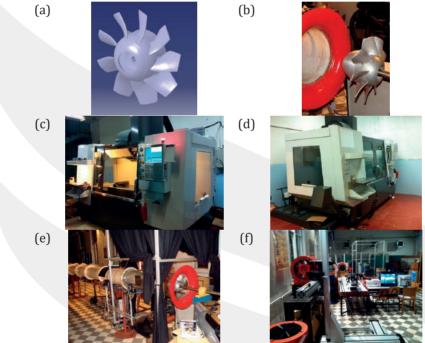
(a) CAD model of the axial fan impeller; (b) Axial fan impeller. [2] (c-d) CNC machines at the UB FME: (c) 4-axis; (d) 5-axis.ef) Test rigs with new experimental equipment at the UB FME: (e) Stereo PIV system; (f) LDA system.
